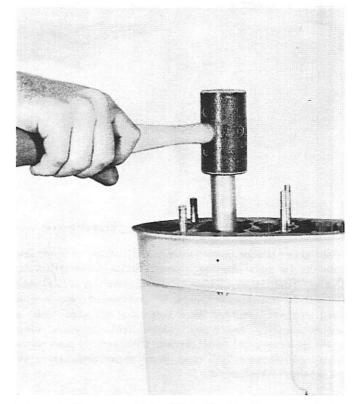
Removing Drive Shaft Needle Bearing in Gear Housing
